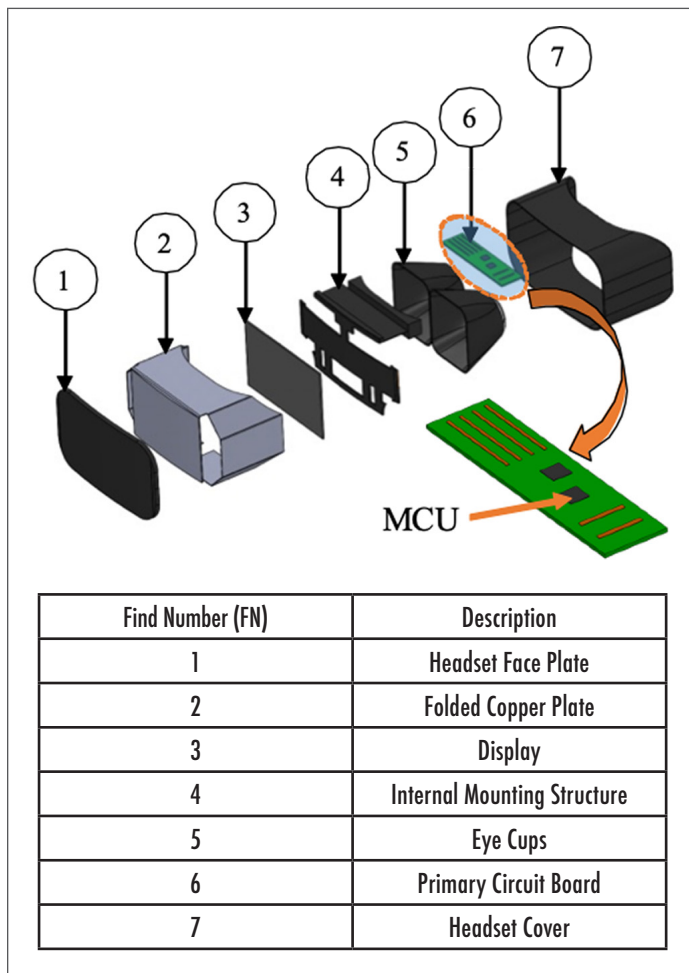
Exploded view of headset assembly with individual components identified as find numbers.
